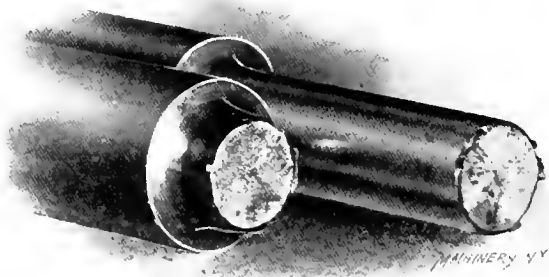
Test Bar, 1-2 inch Diameter. Heat Treated for Mesh-gears. Star Fracture.
